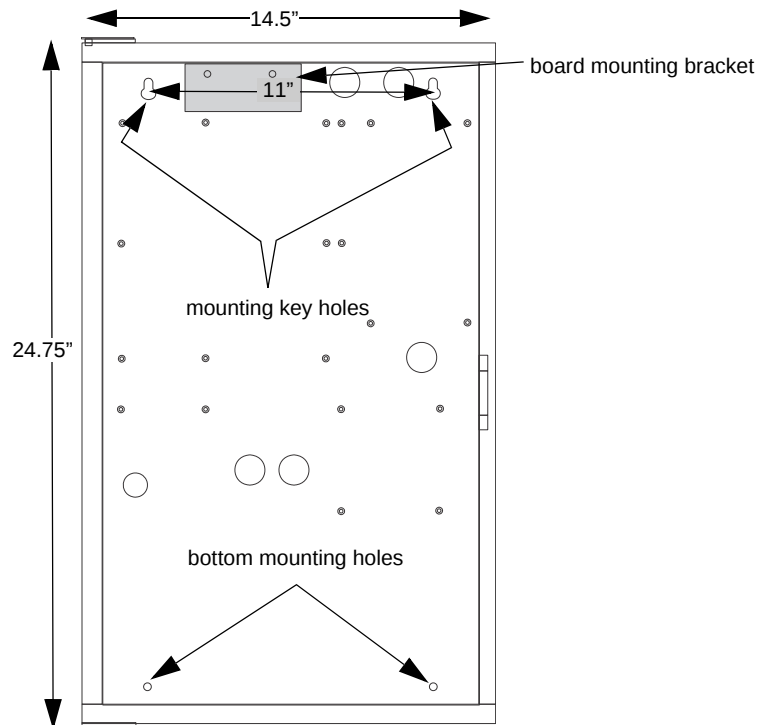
Cabinet Flush-Mount Dimensions and Mounting Hole Locations
